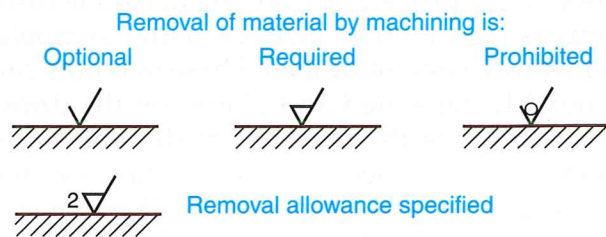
Different conventions are used for surface texture symbols when it is necessary to indicate a control for the removal of material by machining.
